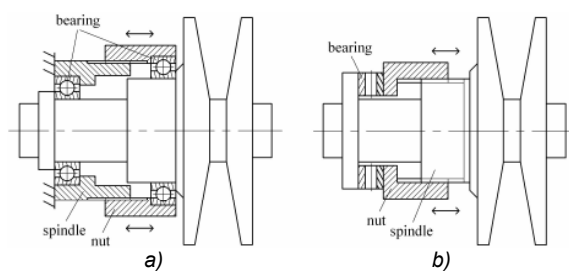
a) Non-rotating spindle, nut and thrust bearings in dry hybrid CVT. b) Rotating spindle, nut and thrust bearing in EMPAct CVT.
